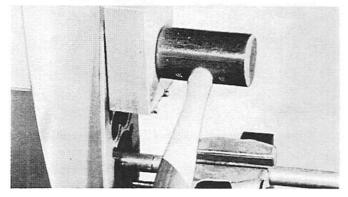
Removing Drive Shaft from Gear Housing Revised May 1960
